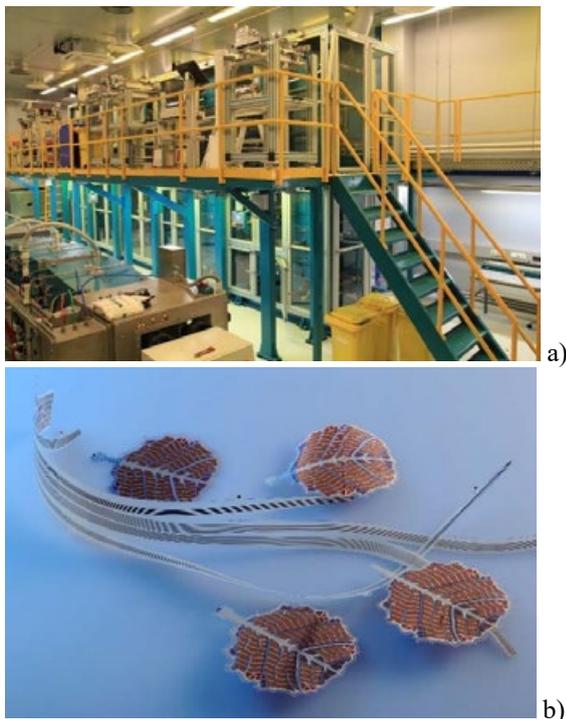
a) R2R pilot fabrication equipment at VTT and b) printed free-form OPVs [27].
